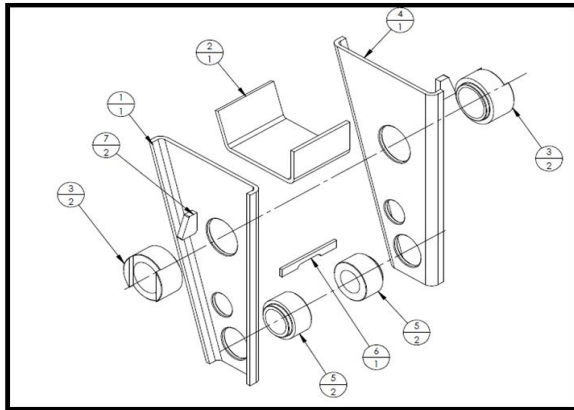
Equalizer Hanger Welding Assembly PD900392
